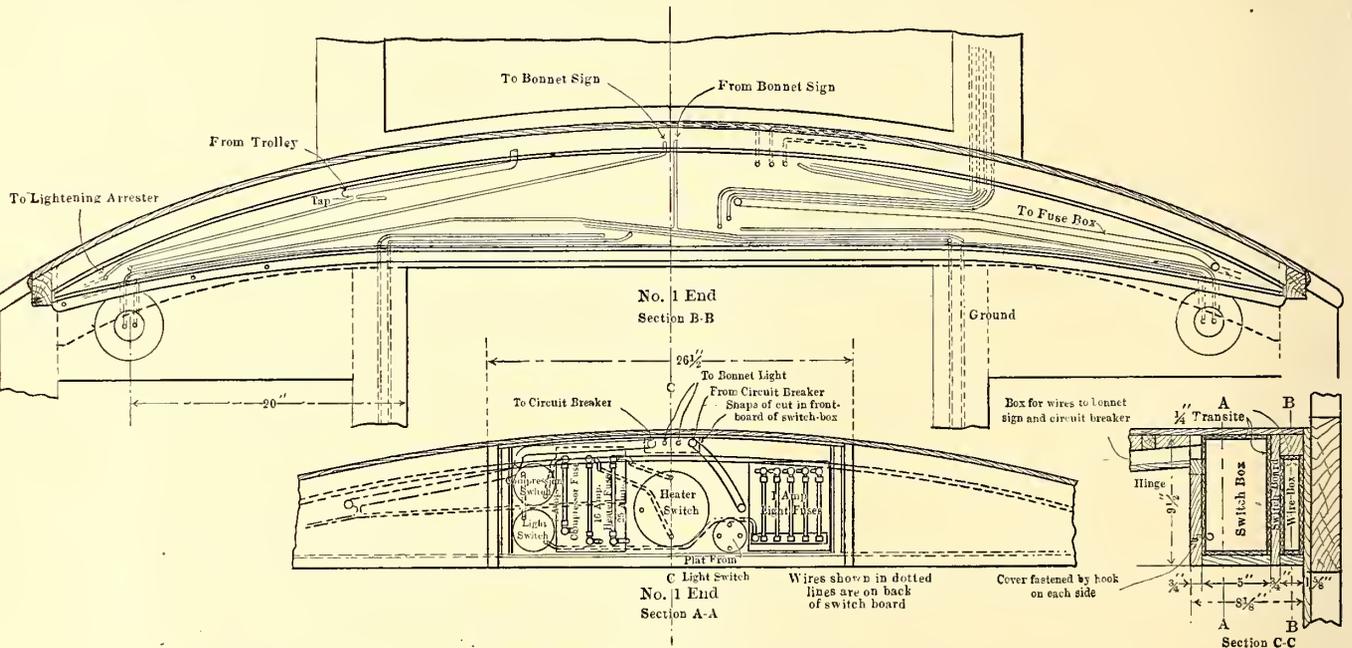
SECTIONS AT NO. 1 END OF CAR, SHOWING WIRING, SWITCH AND WIRE BOXES
